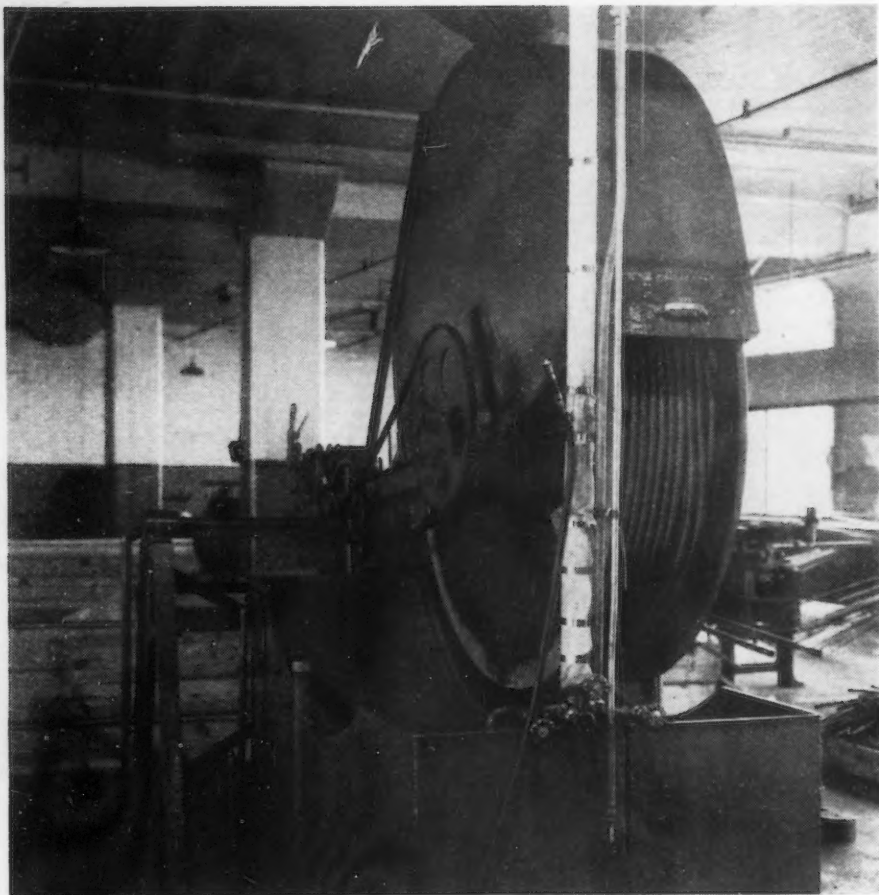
Washing machine, showing two tanks. One tank contains solvent and the other contains boiling water. The drum is revolved mechanically in each tank in turn.
